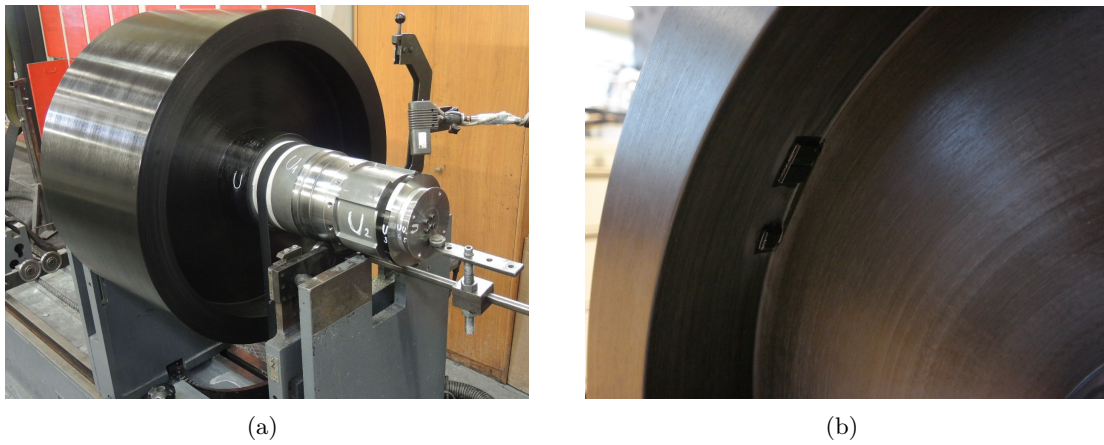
Automatic balancing of the FESS rotor: (a) balancing machine; (b) resulting corrective masses.
